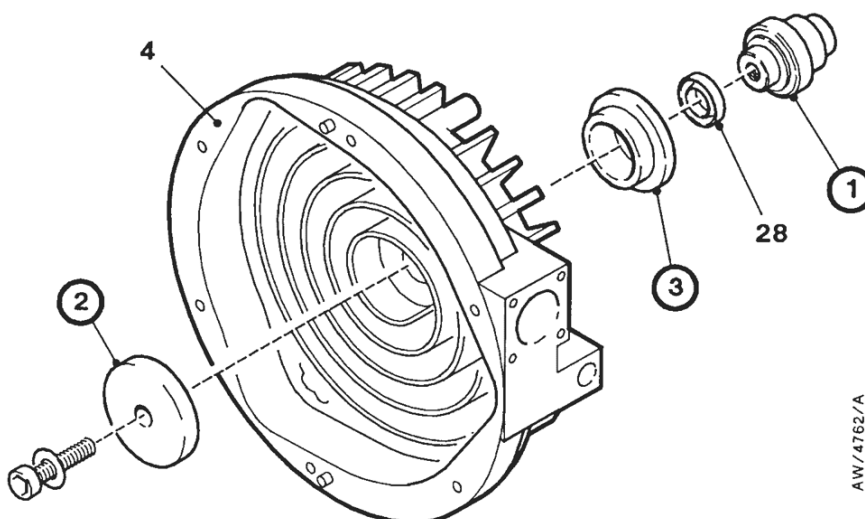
Remove the Shaft Seal, Grease Seal and Needle Bearing from the ESDP30/30A
